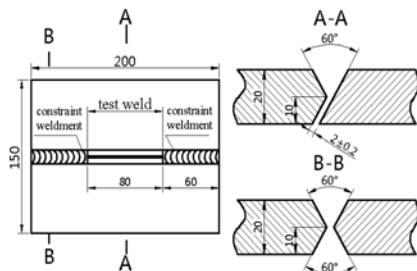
Schematic graph of specimen for Y-groove cracking test.
